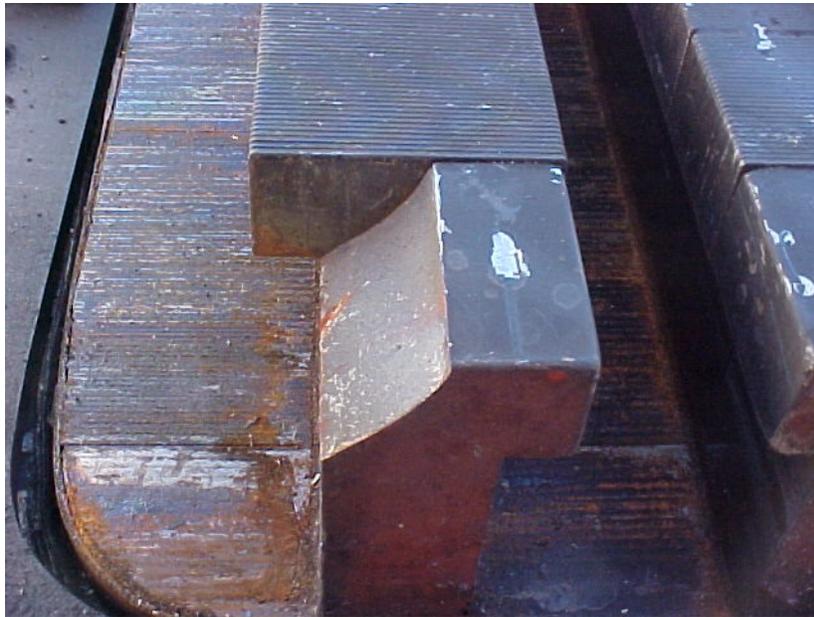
above shows crack completely through Tee head section. Note the similarity in the failed tooth top shown previously in Figure 3.
